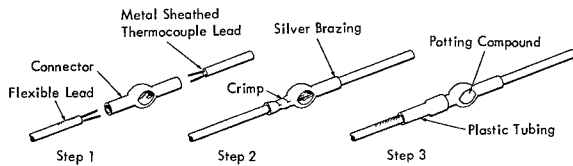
Assembly details of connecting metal-sheathed thermocouple wires to flexible lead wire.
